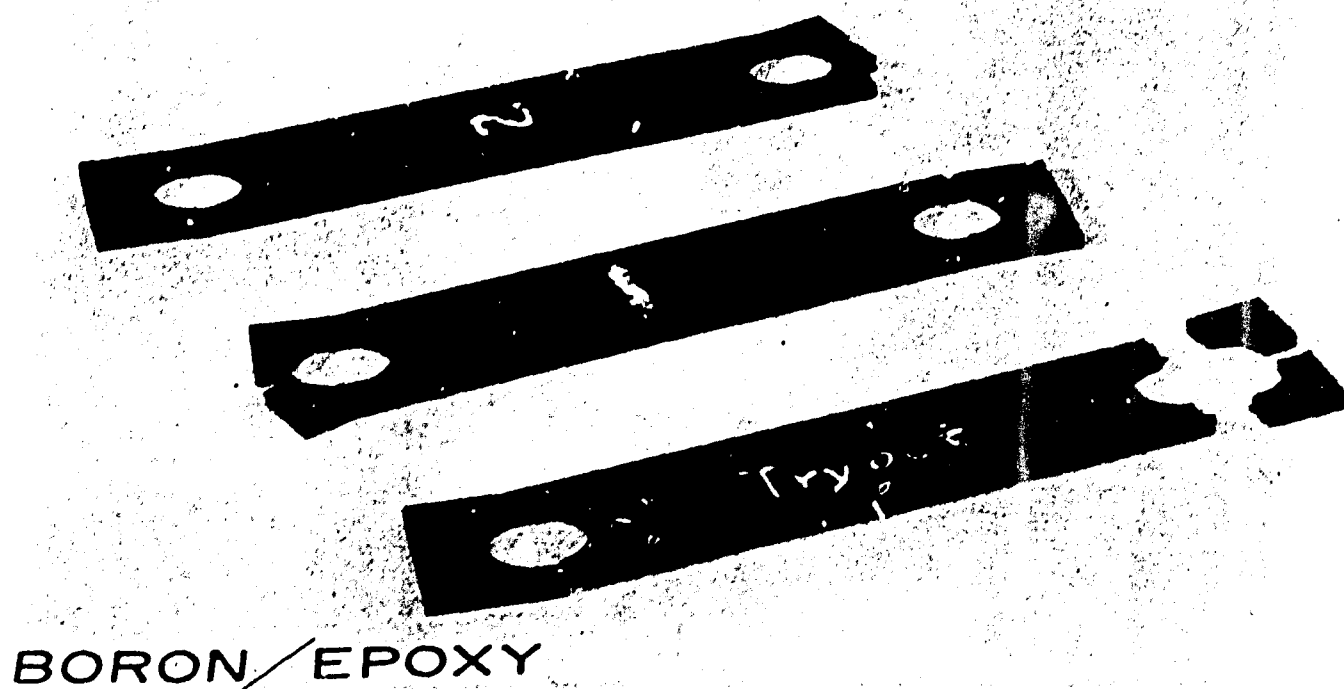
Boron-Epoxy Pin Bearing Specimens After Test
